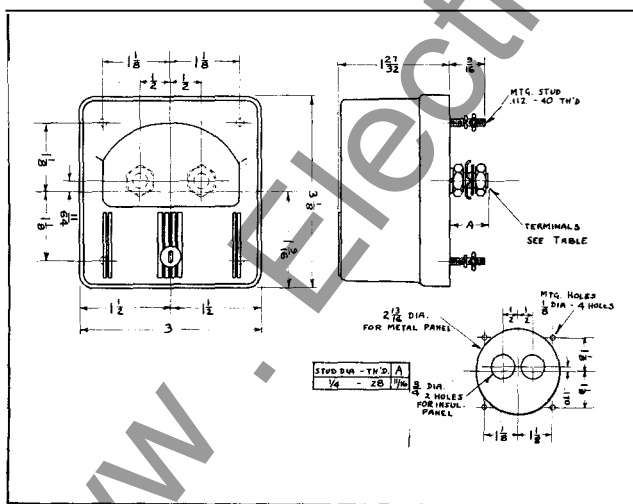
Outline and Drilling Plan of the Projection Type Test Milliammeter. For Reference Only.
